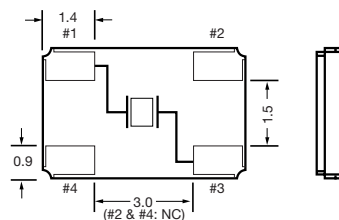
ECX-64CEN - Pad Configuration Bottom and End views
